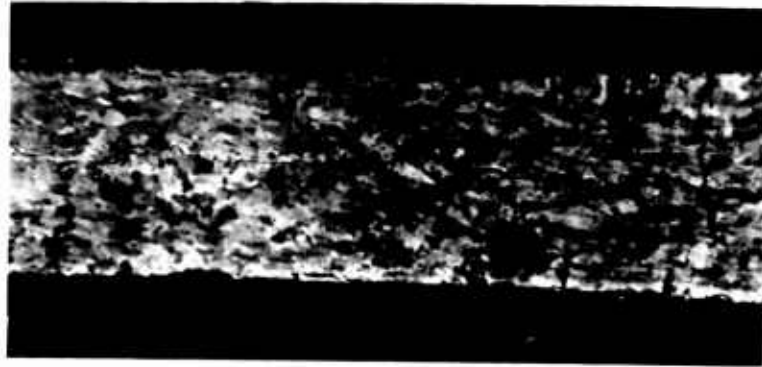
Cracks in weld zone of 0.005-inch
